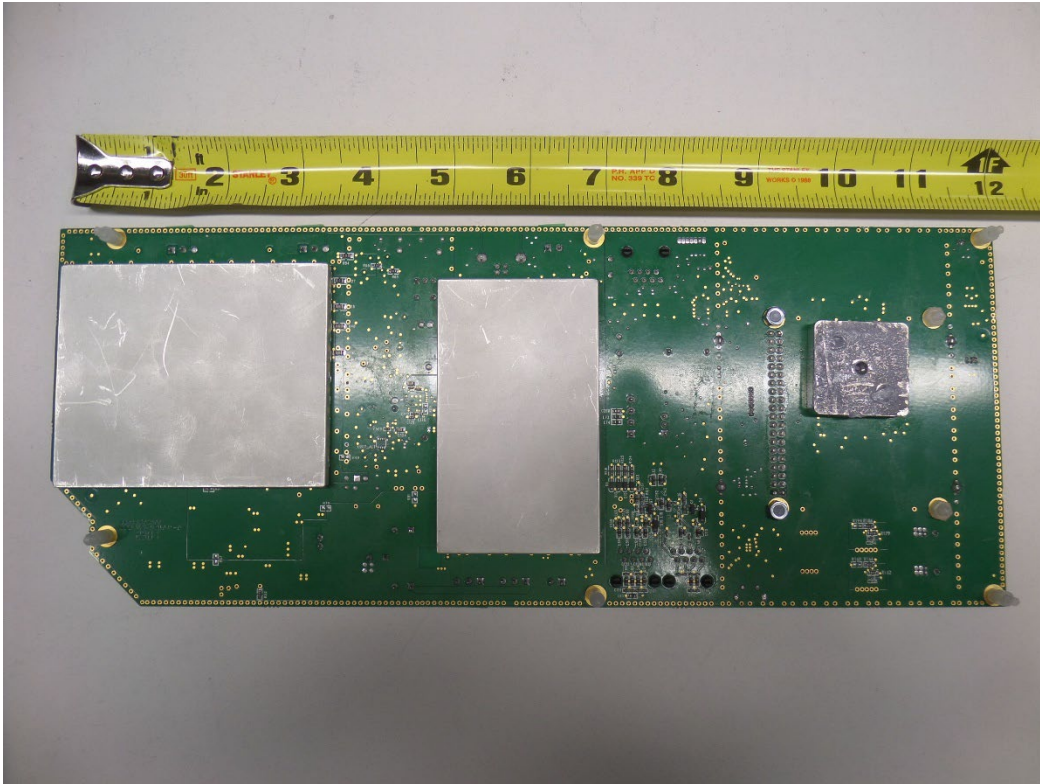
NP12 PRI/PAB LOWER BASE EAS RF BOARD BOTTOM SIDE
